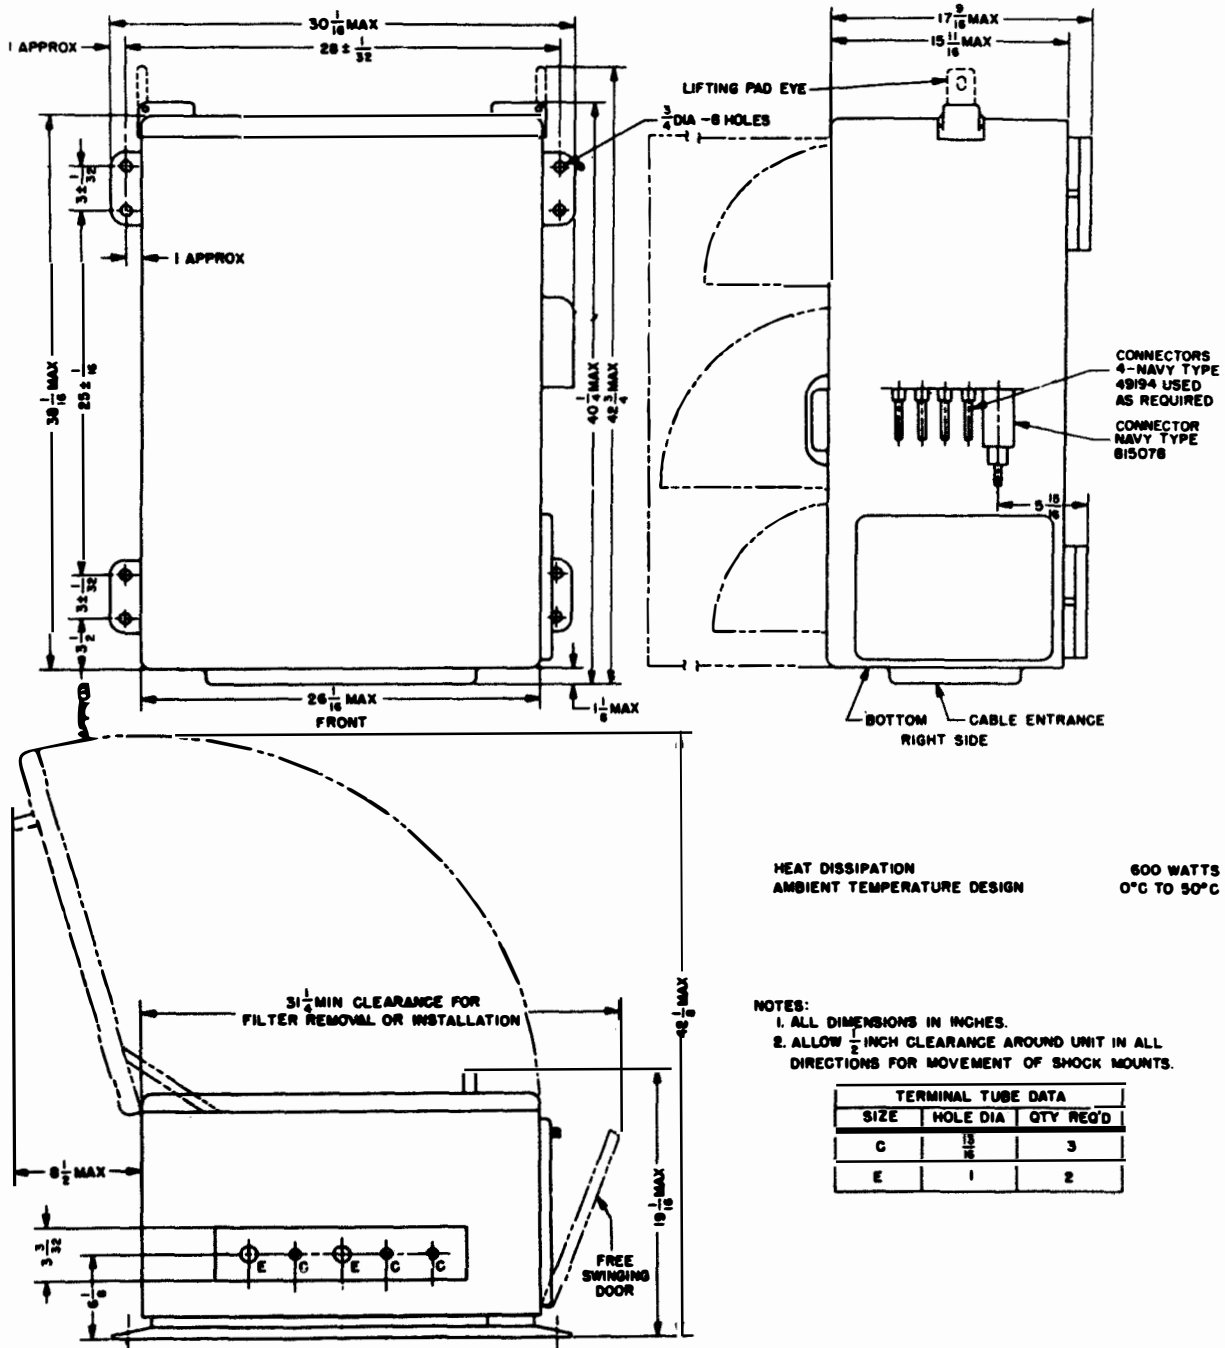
Modulator MD-140/XXX-1, Outline Drawing
